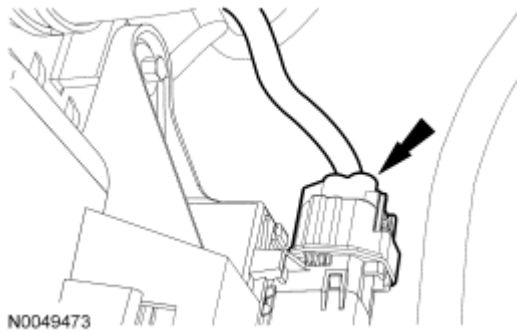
Disconnecting Cooling Fan Electrical Connector
